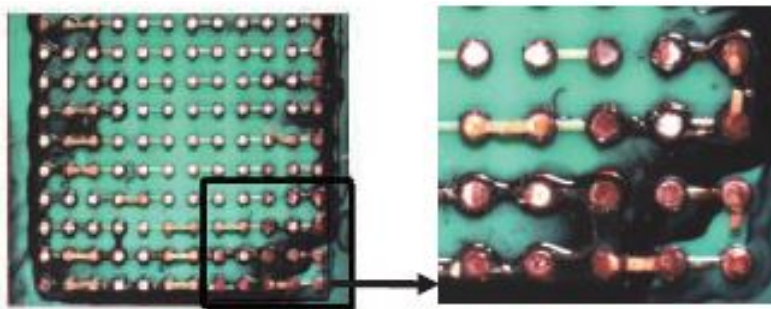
Chip fracture surface after dye test [26].
